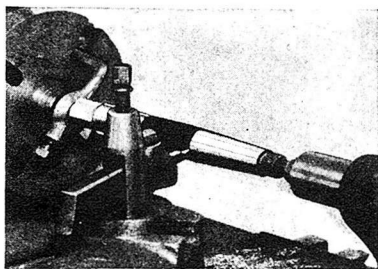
Machining a Taper with the Tailstock Top Set Over
